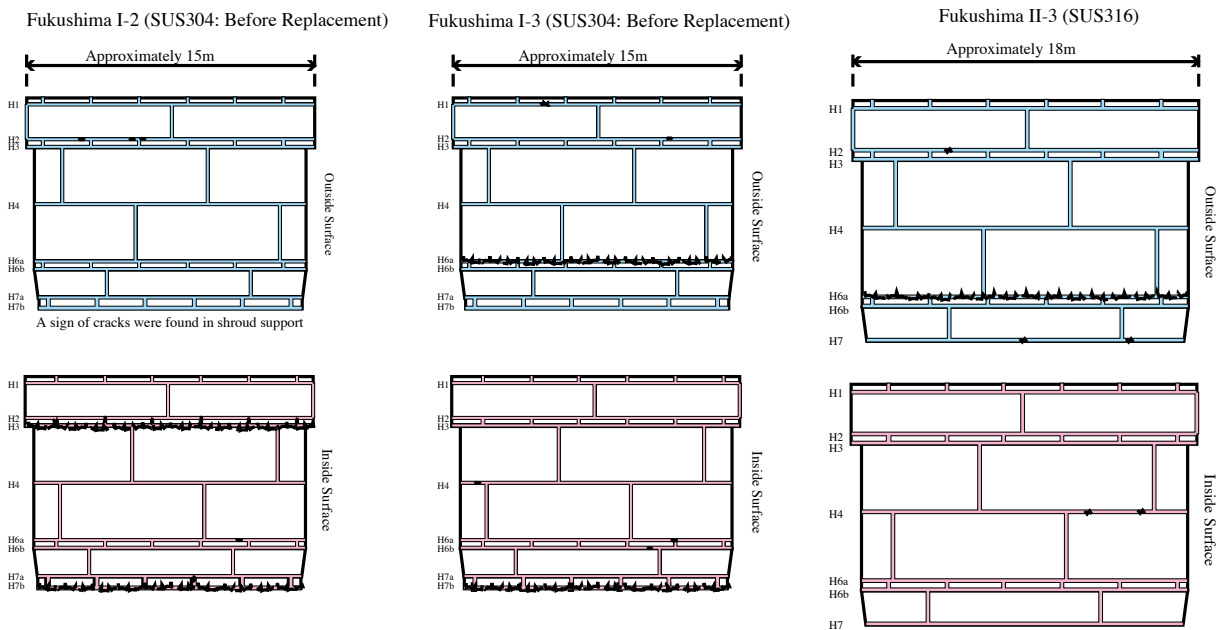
Cracks in core shroud at Fukushima I-2, I-3, and II-3
